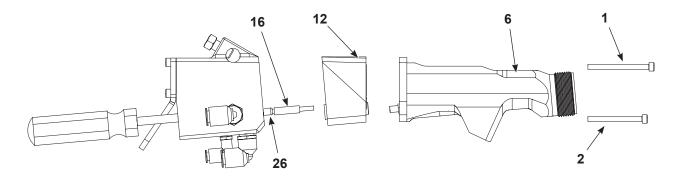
Disconnecting the Connecting Rod from the Adapter Link and the Puller Shaft
